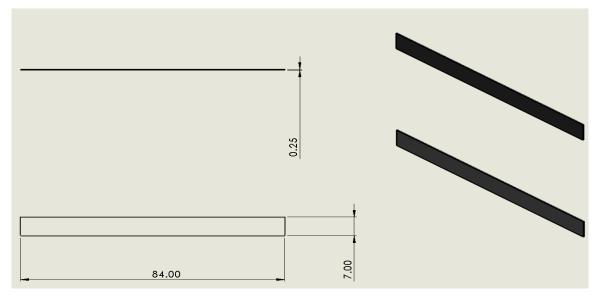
Drawing of the Long rubber pad, with dimensions in inches.
